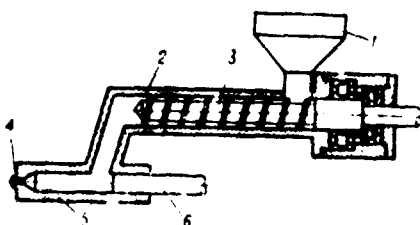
Schematic of casting unit of machine with screw plasticizing. 1) Feeder; 2) cylinder for preliminary plasticizing; 3) screw of cylinder for preliminary plasticizing; 4) nozzle; 5) injection cylinder; 6) injection cylinder plunger.
